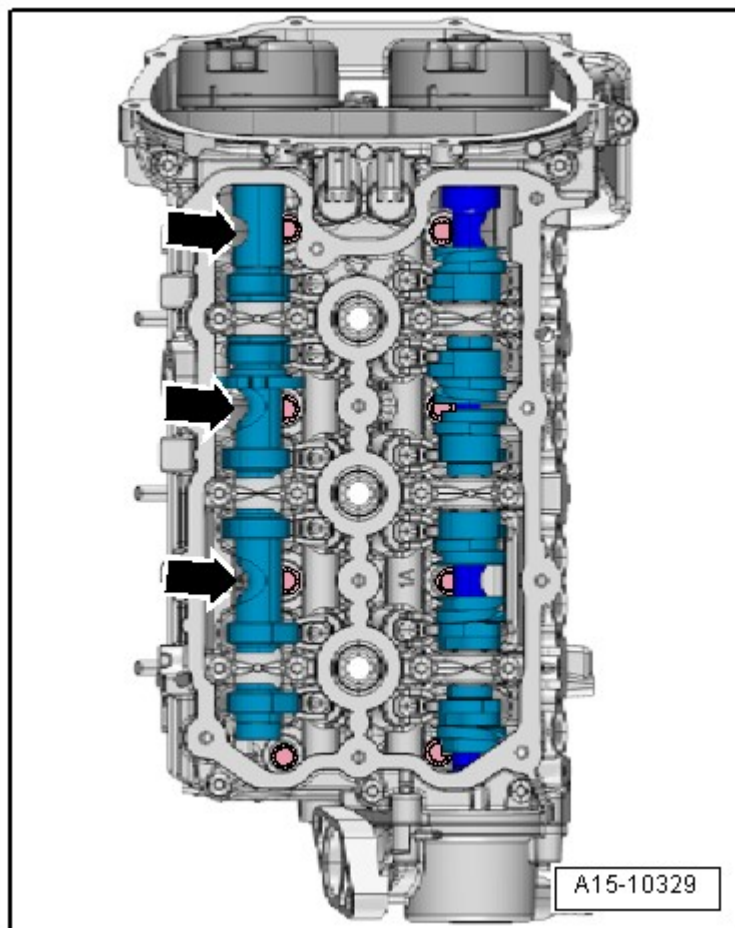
Identifying Exhaust Camshaft Openings Alignment
